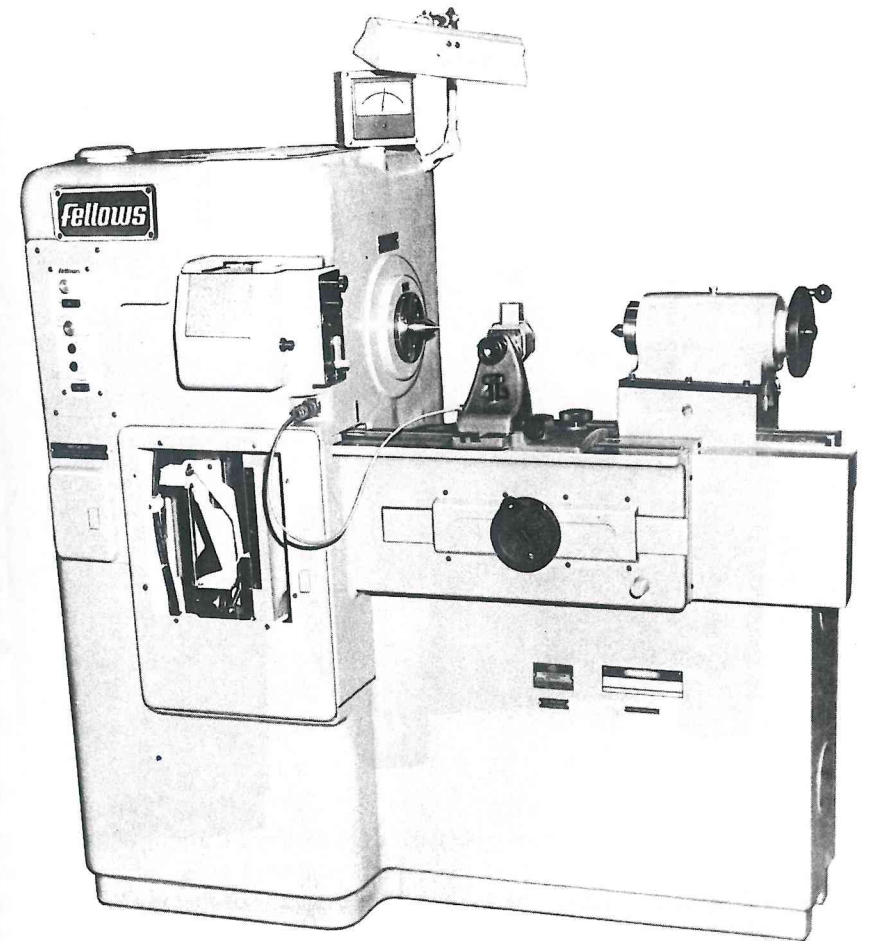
Lead checking machine. (Courtesy of Fellows Corporation, Springfield, Vt.)
